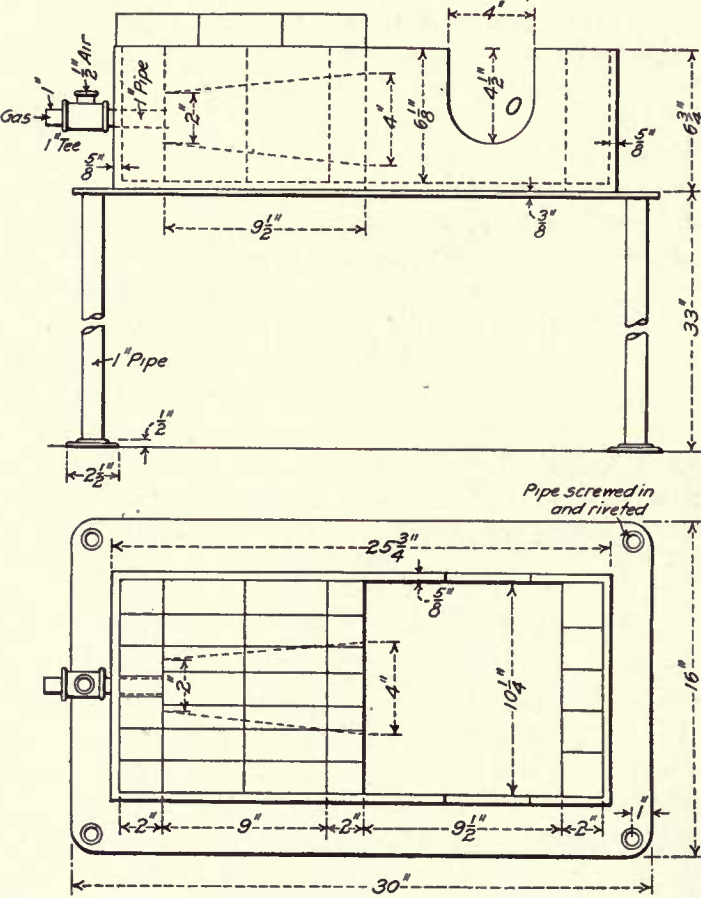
Gas Furnace for Pipe Bending and Brazing.
